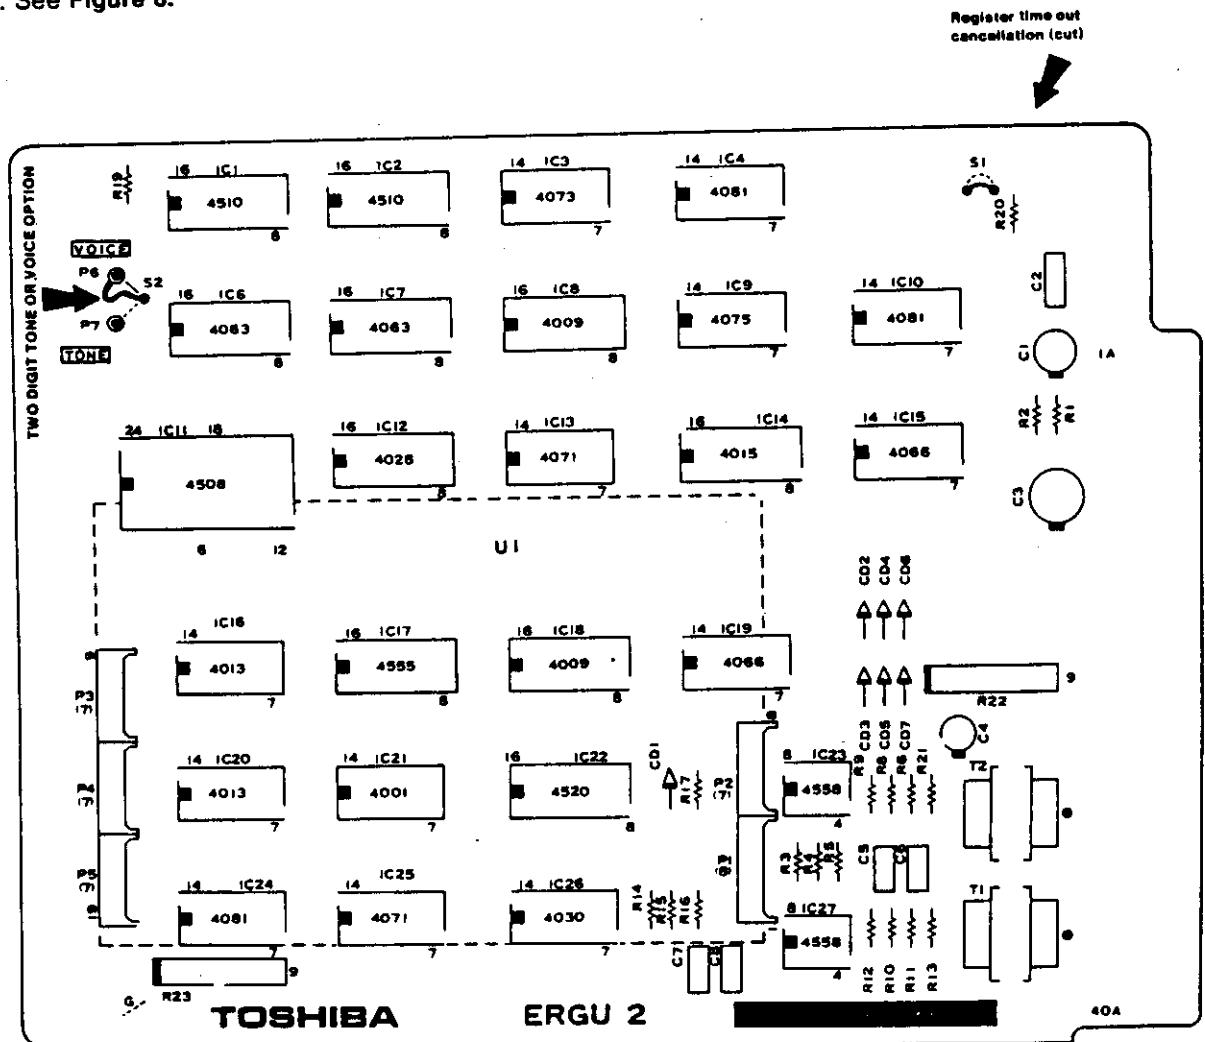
ERGU-2 PCB - PHYSICAL LAYOUT
